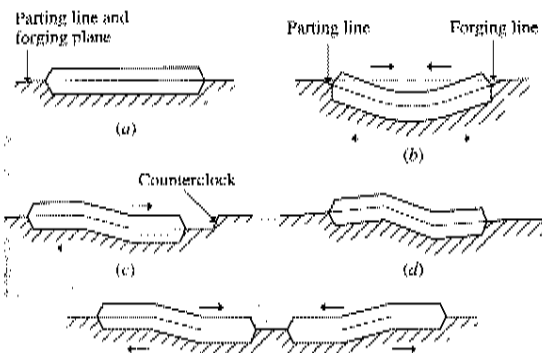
Drawings illustrating the design rules for use of straight and broken parting lines for closed impression forging dies
